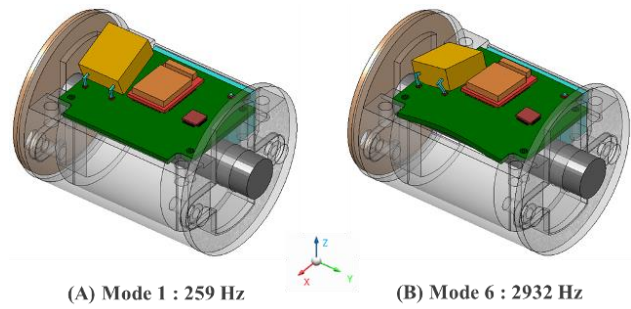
Mode shapes: (A) Mode 1 - supercapacitor out of plane motion (B) Mode 2 - PCB bending
